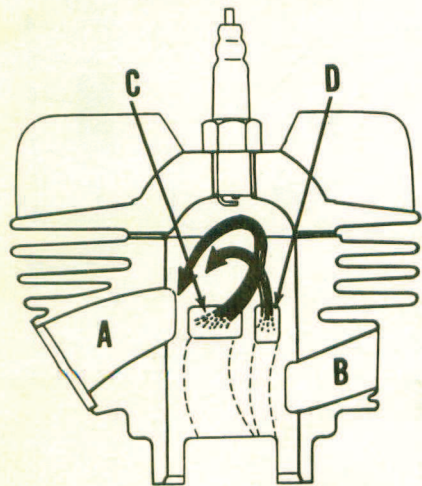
Basic port pattern of cylinder may be seen in this drawing.
